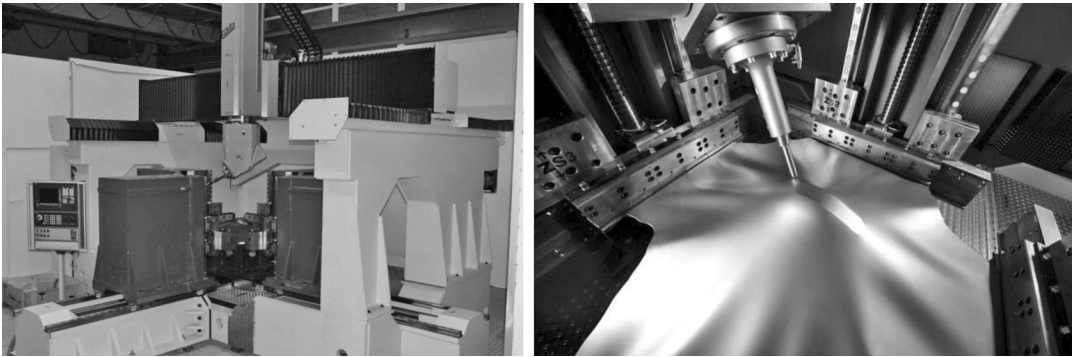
Sheet metal forming center combining stretch forming and five-axis incremental sheet forming. Source: Ref 13.19
